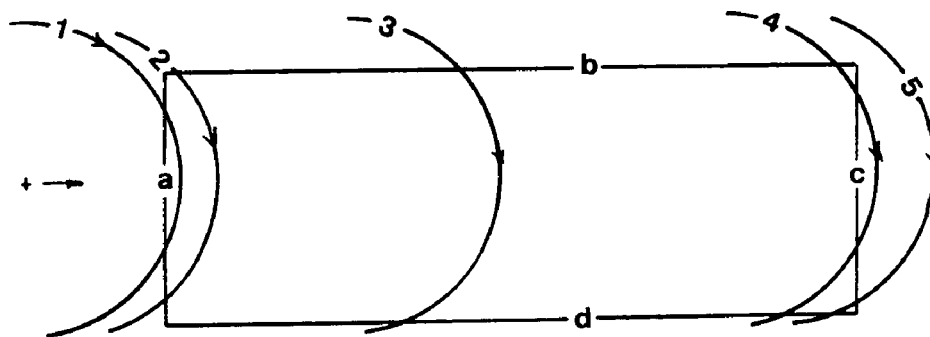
(a): Entry/Exit with a Rectangular Workpiece
